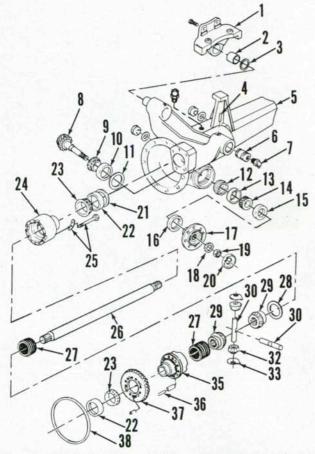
Exploded view of differential components and right axle housing used on APL-355 axles. The APL-345 axle is similar.
